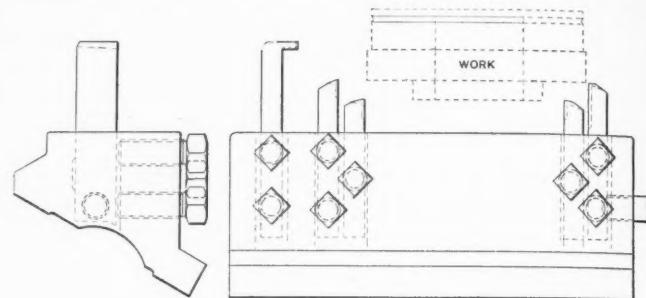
Tool Slide used with Fixture in Fig. 6.
